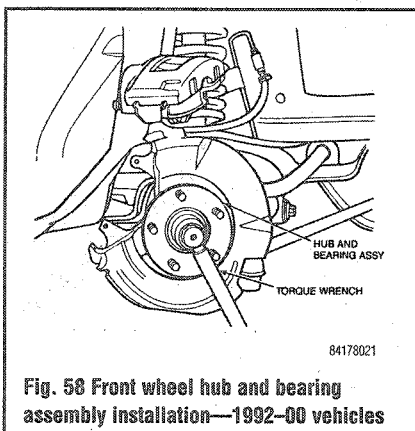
Front wheel hub and bearing assembly installation—1992-00 vehicles
